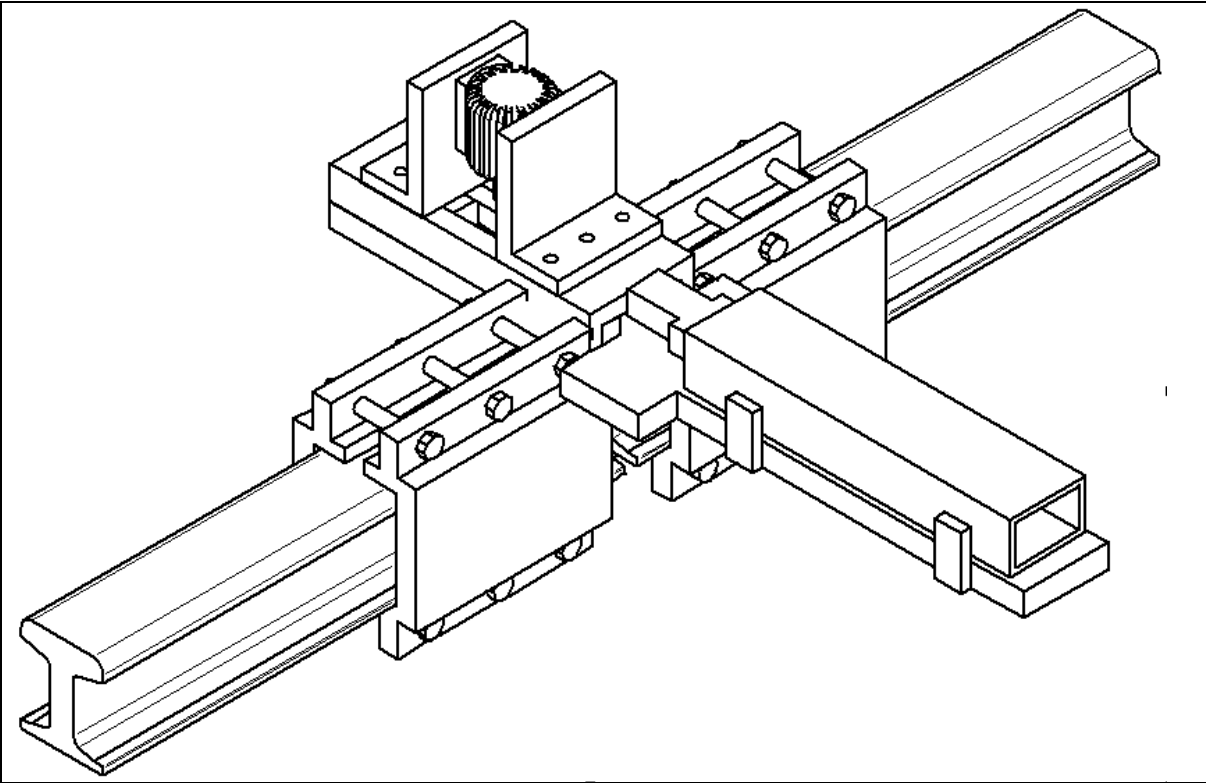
Friction stir welding machine applied in rail joining-concept 2
